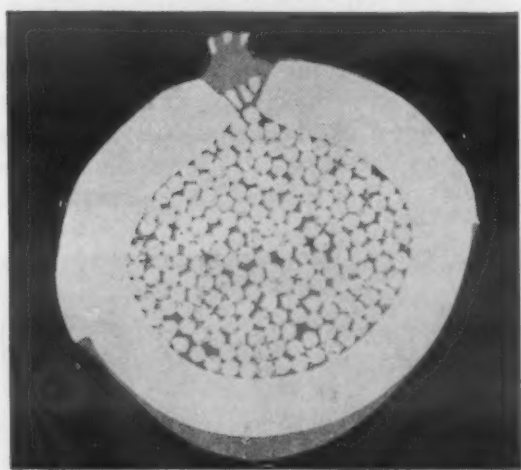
Photomicrograph showing a cross section of an aluminum cable soldered by immersing it in a molten bath of 70% Zn 30% Sn solder using a liquid flux developed by Kaiser Aluminum. 5X.
